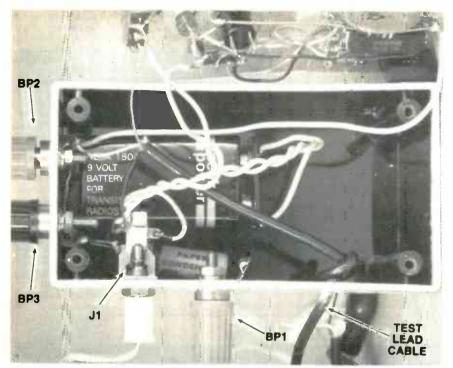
BINDING POSTS and earphone jack are mounted on case. Refer to Fig. 3 for details of connections to PC board.
